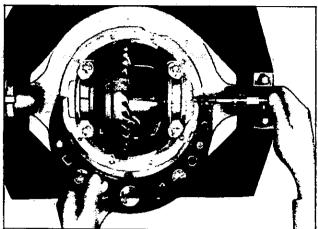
Measurement of Back Lash for the Drive Pinion & Ring Gear
